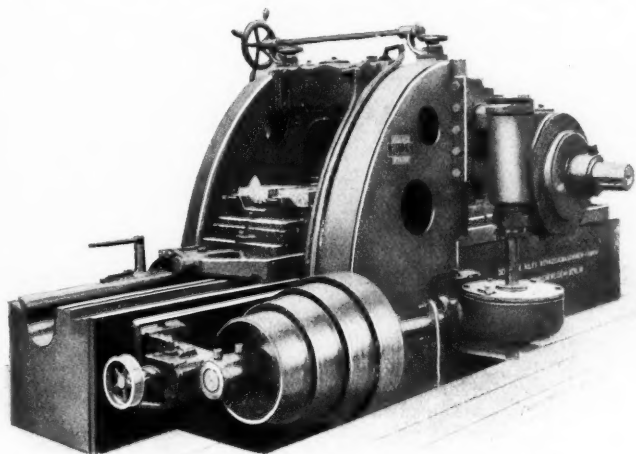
German Milling Machine weighing twelve tons and requiring fifty H. P. for Driving.
